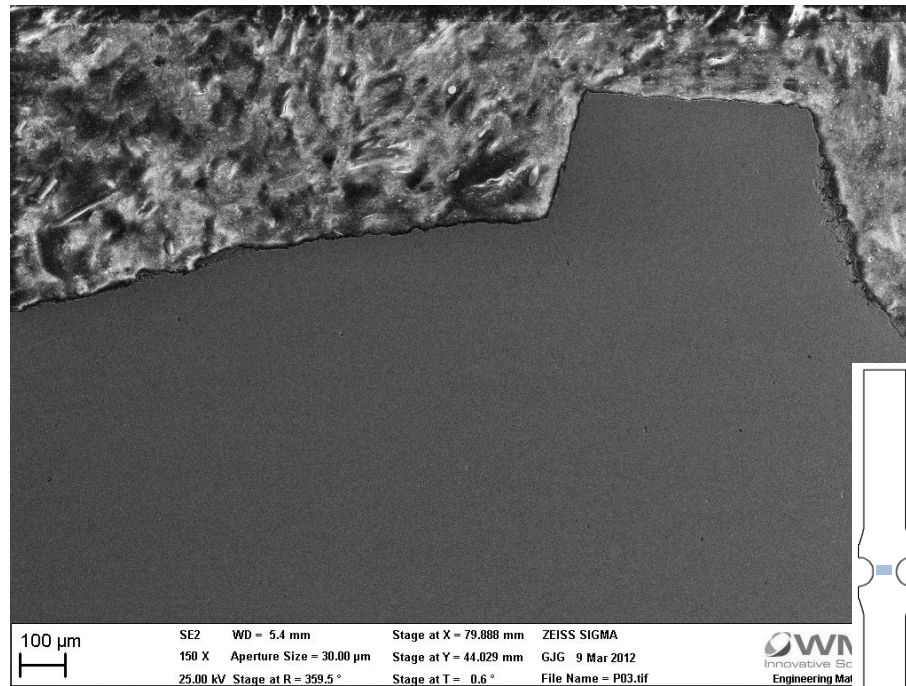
Low resolution image of section through DP800 plane-strain fracture specimen showing shape of fracture surface
